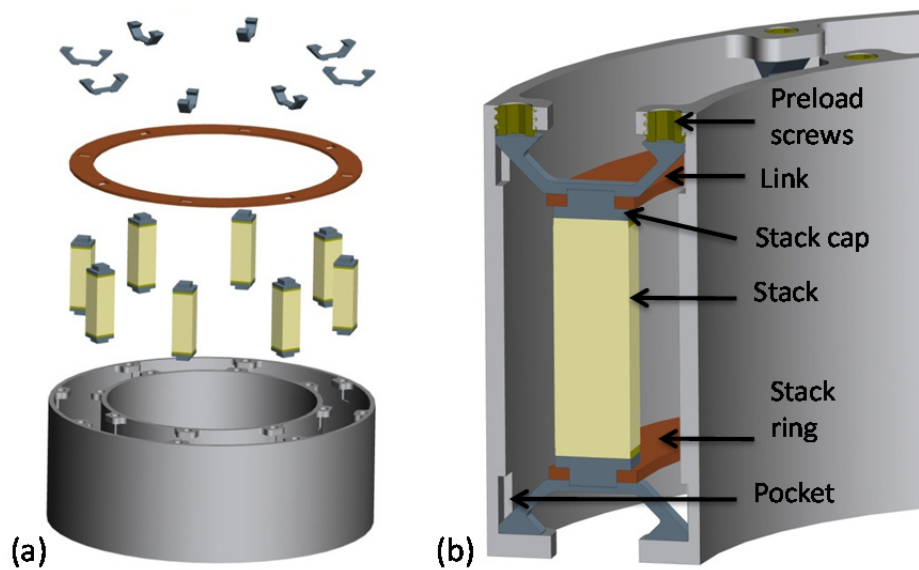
Con11a solid model. (a) Exploded view, (b) Cross section.
